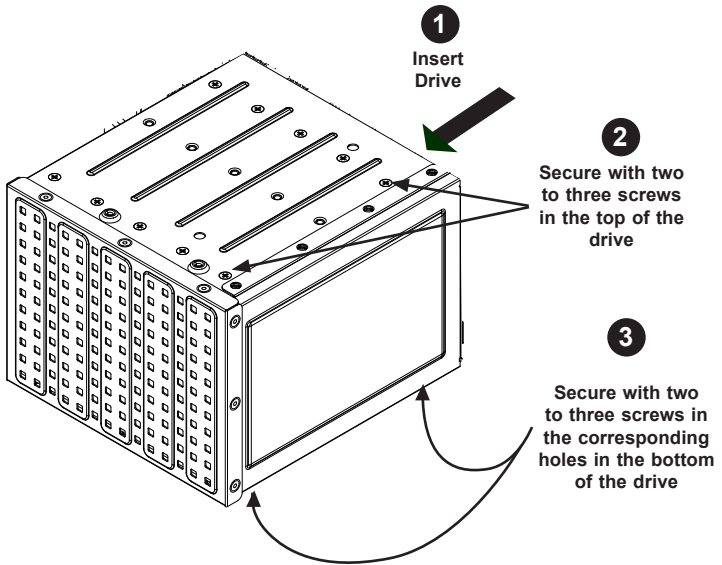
Installing Hard Drives into the Internal Hard Drive Cage
